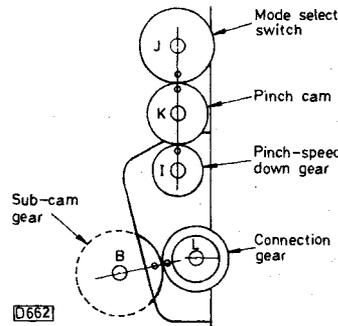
Assembly/alignment of the items on the top of the mechanism.
